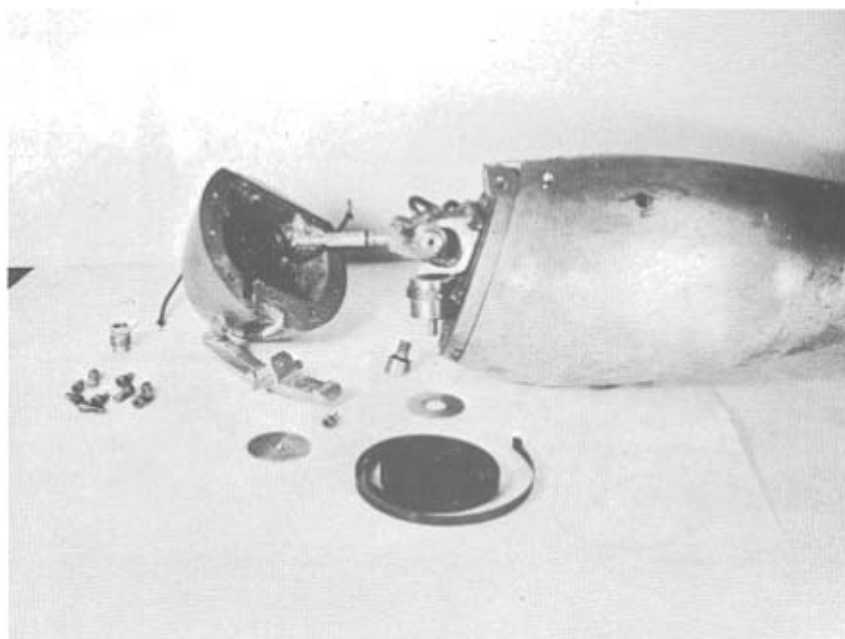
Valve mechanism for third experimental point-integrating sampler, US P-46, partially disassembled
